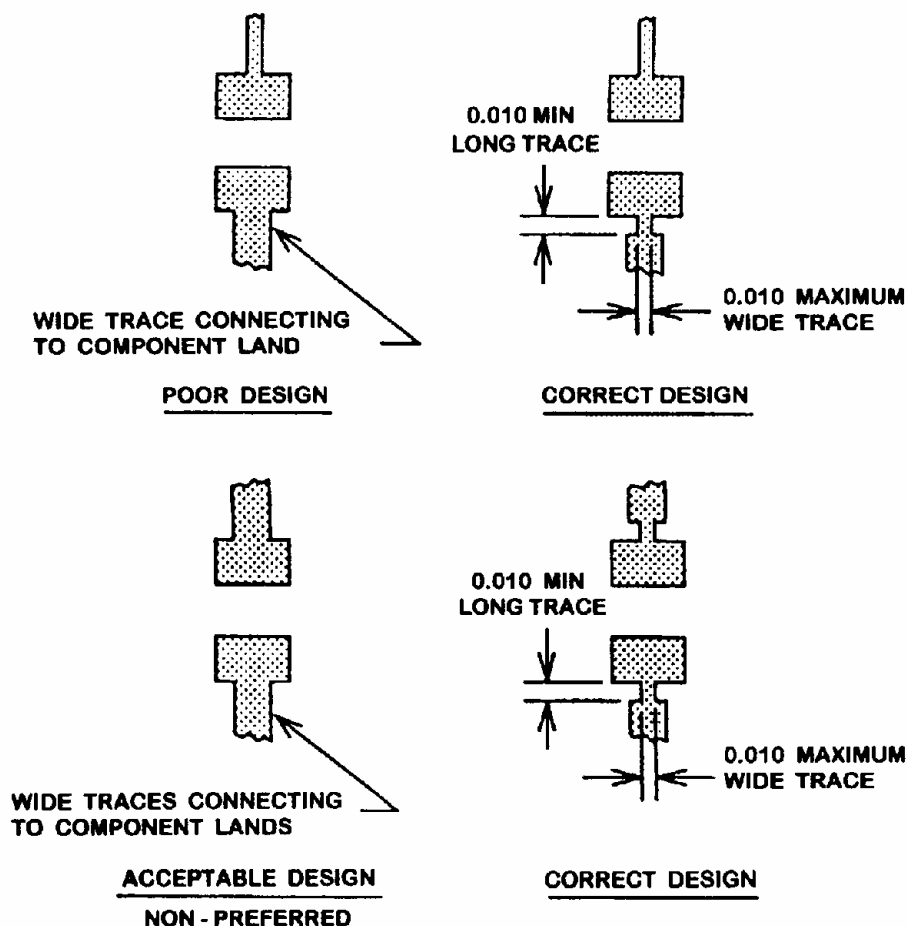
CONNECTING THICK TRACES TO COMPONENT LANDS
